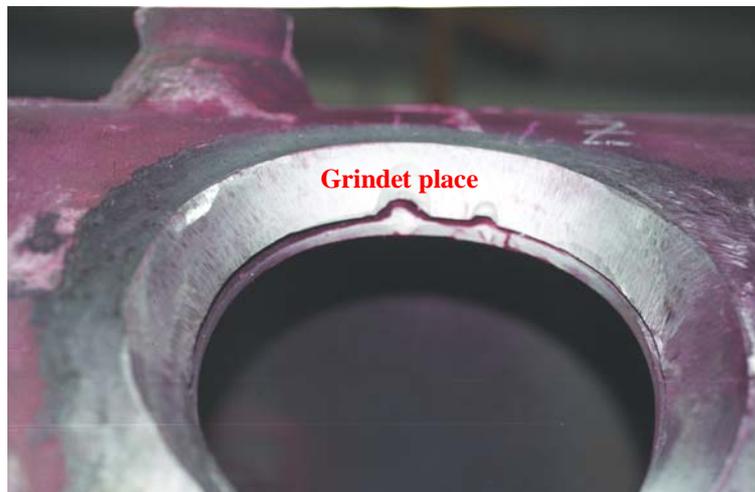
Weld preparation by grinding close to cracks.
